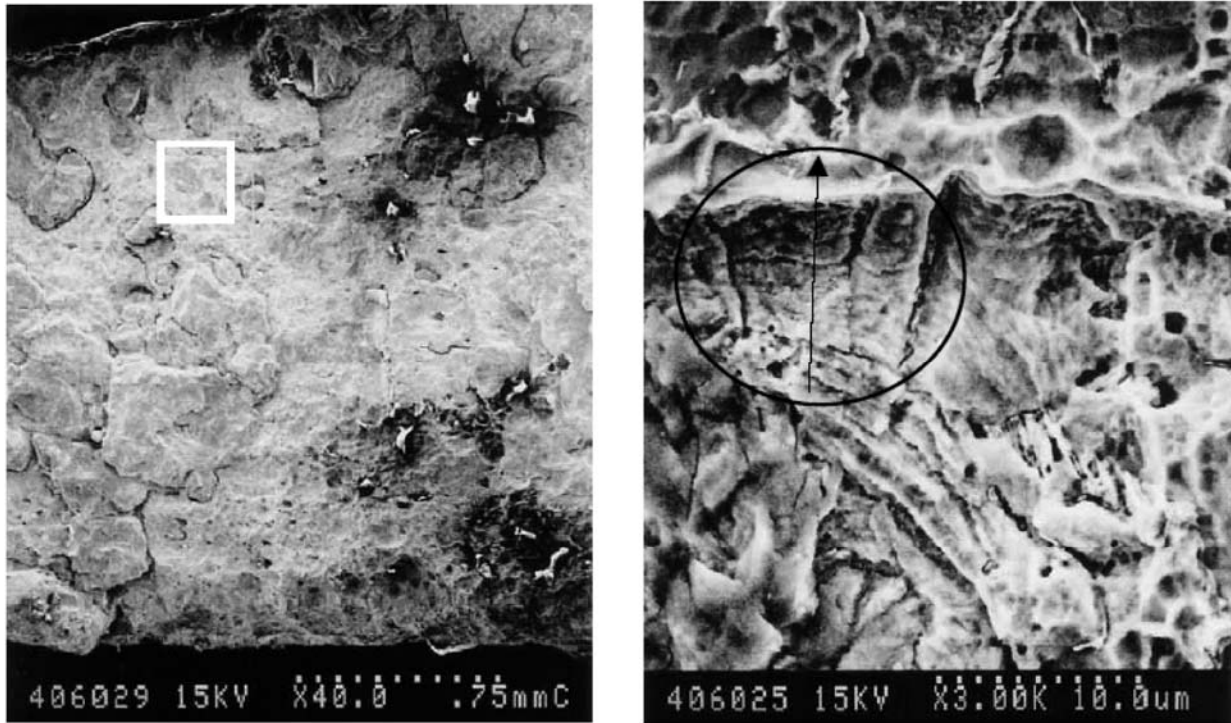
Closeup View of Area 1-C in Macroscopic Specimen.
